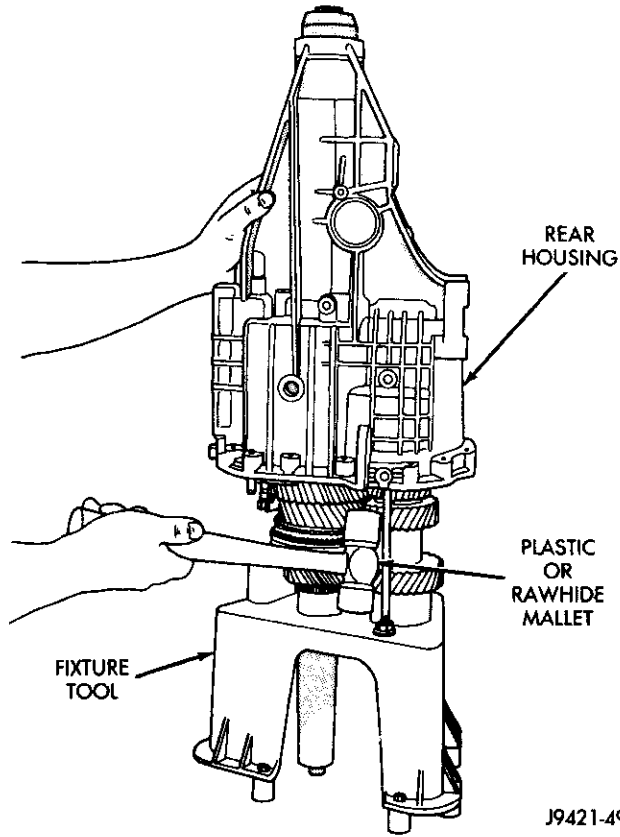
Unseating Rear Housing From Output Shaft Bearing—2WD
